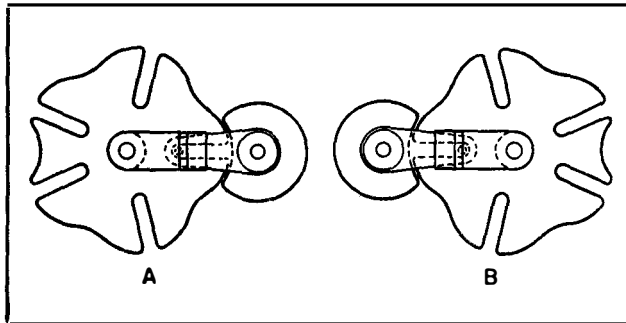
Geneva Gearing for Type URS Cam Switch Unit (Position Shown is for Position O)
